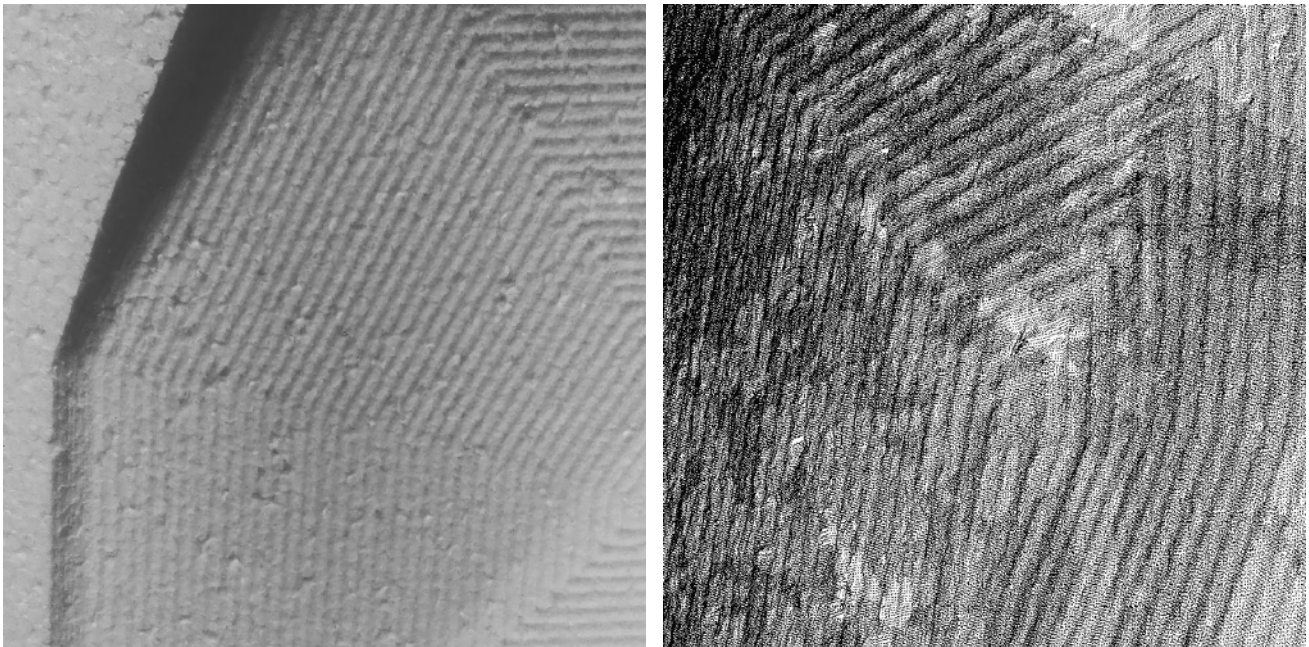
Hybrid Territories: Photograph and Scan of Milling Toolpath.
